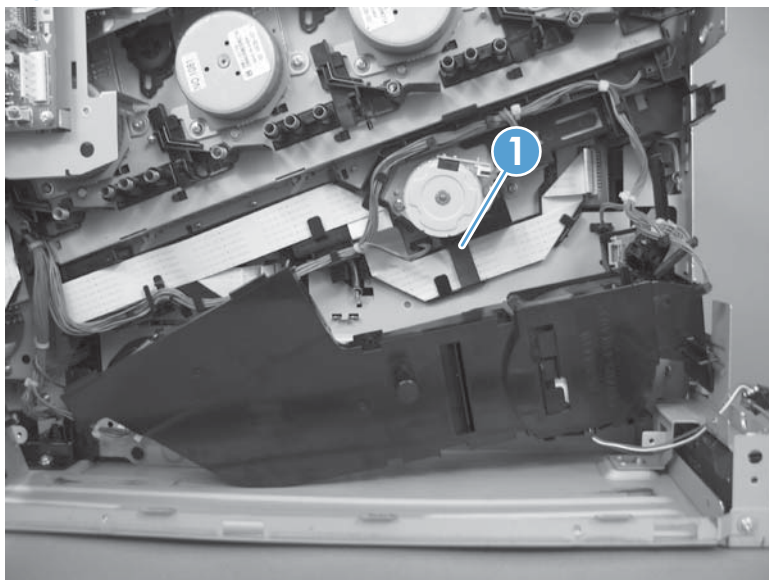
Remove the exhaust fan and fan duct (3 of 3)
